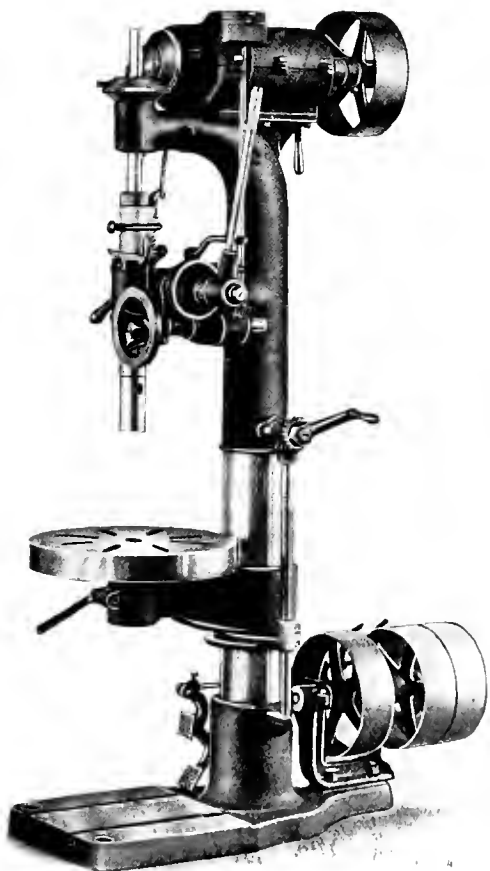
Sibley Drill Press with Geared Quick-change Speeds and Feed
